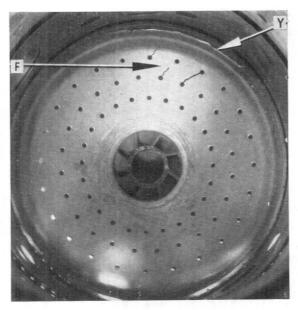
View through rear end of flame tube showing cracks in the flare.
